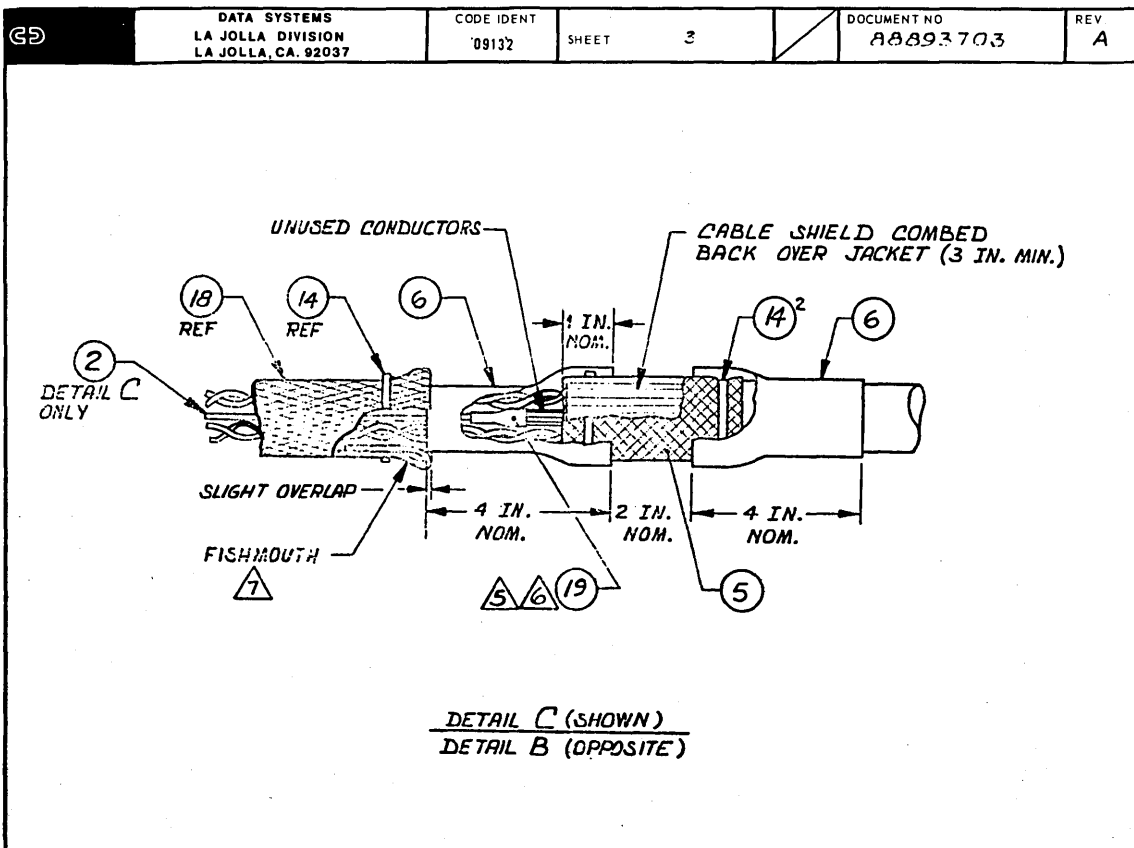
Cable Assembly - Bus In Expansion (Sheet 2 of 5)
